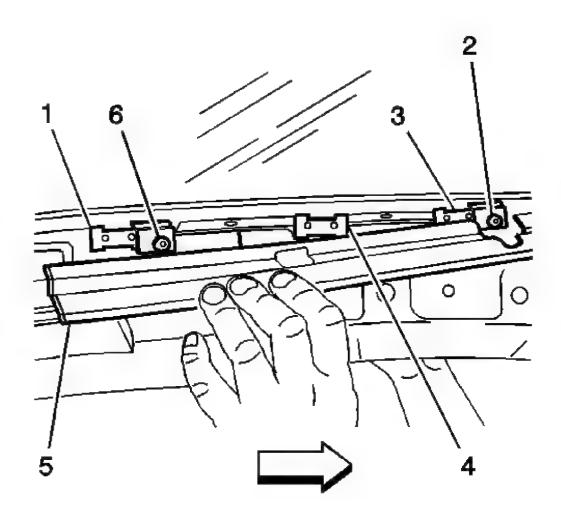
Identifying Sunroof Panel Side Opening Closeout Panel Cover Courtesy of GENERAL MOTORS CORP.
